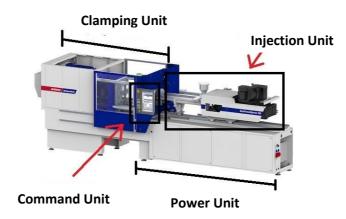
Units incorporated in an injection molding machine. (Battenfeld EcoPower Xpress 160)
